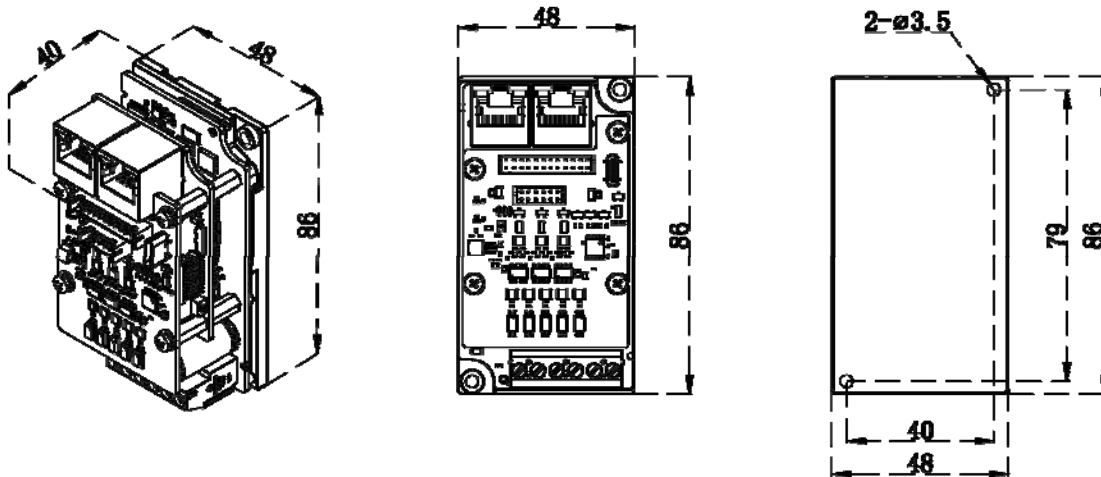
Outline dimension diagram of Type A driver
